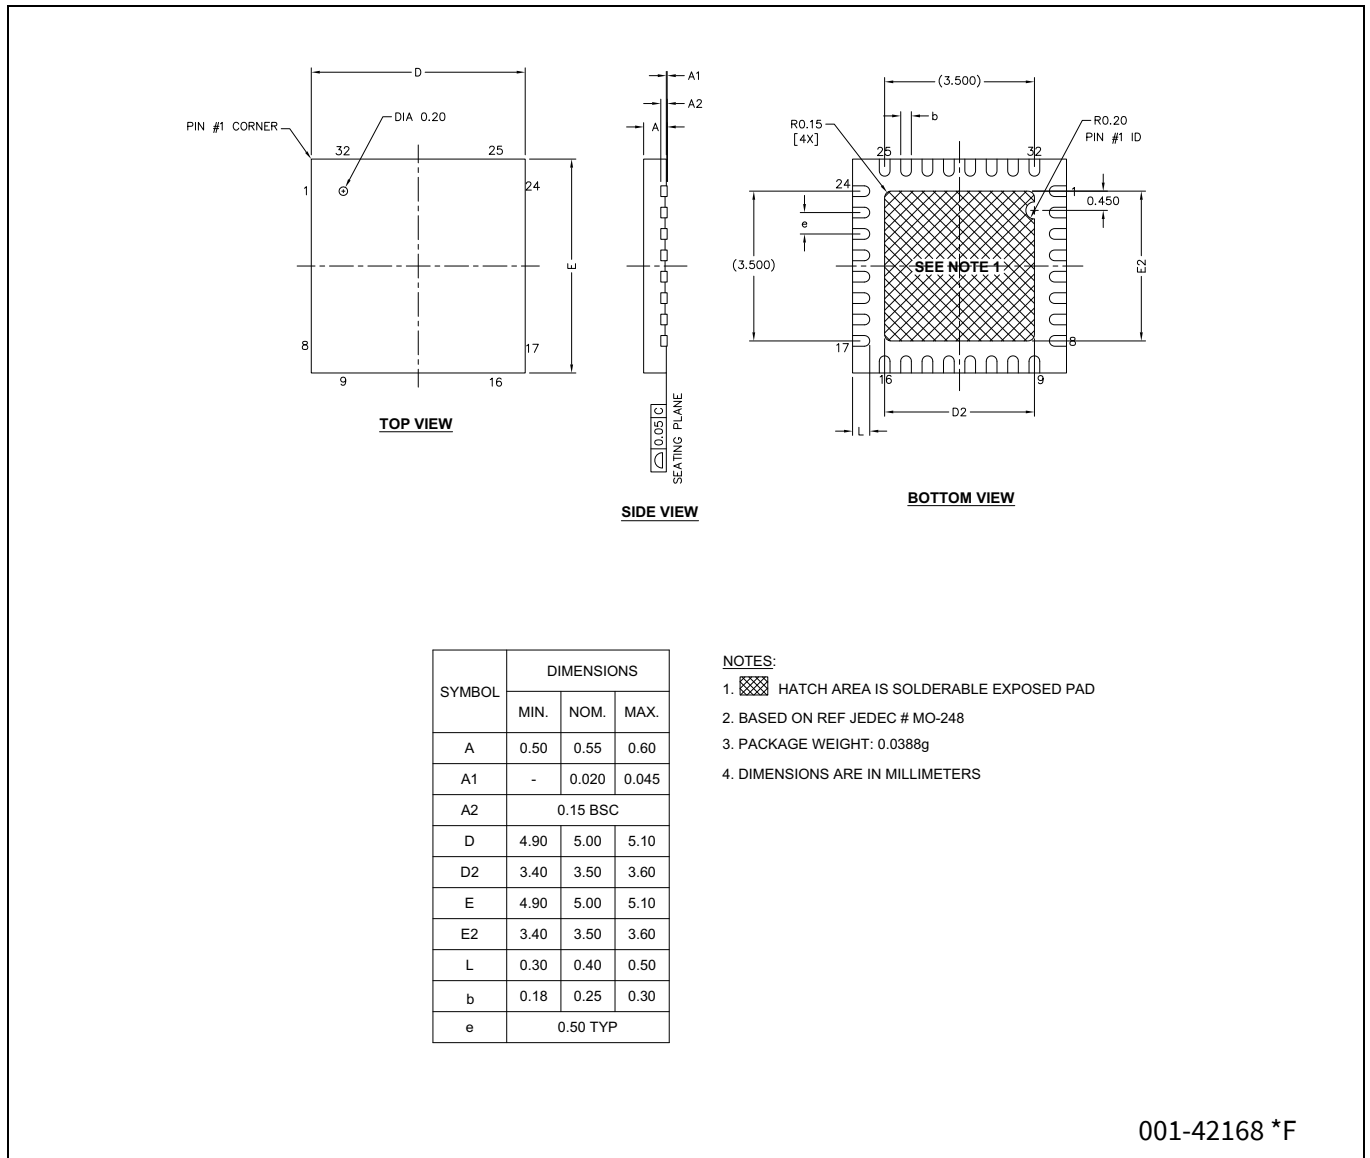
32 LEAD QFN 5.0x5.0x0.55 MM LQ32/LQ32B 3.5x3.5 MM EPAD (SAWN), PACKAGE OUTLINE, (PG-VQFN-32)
